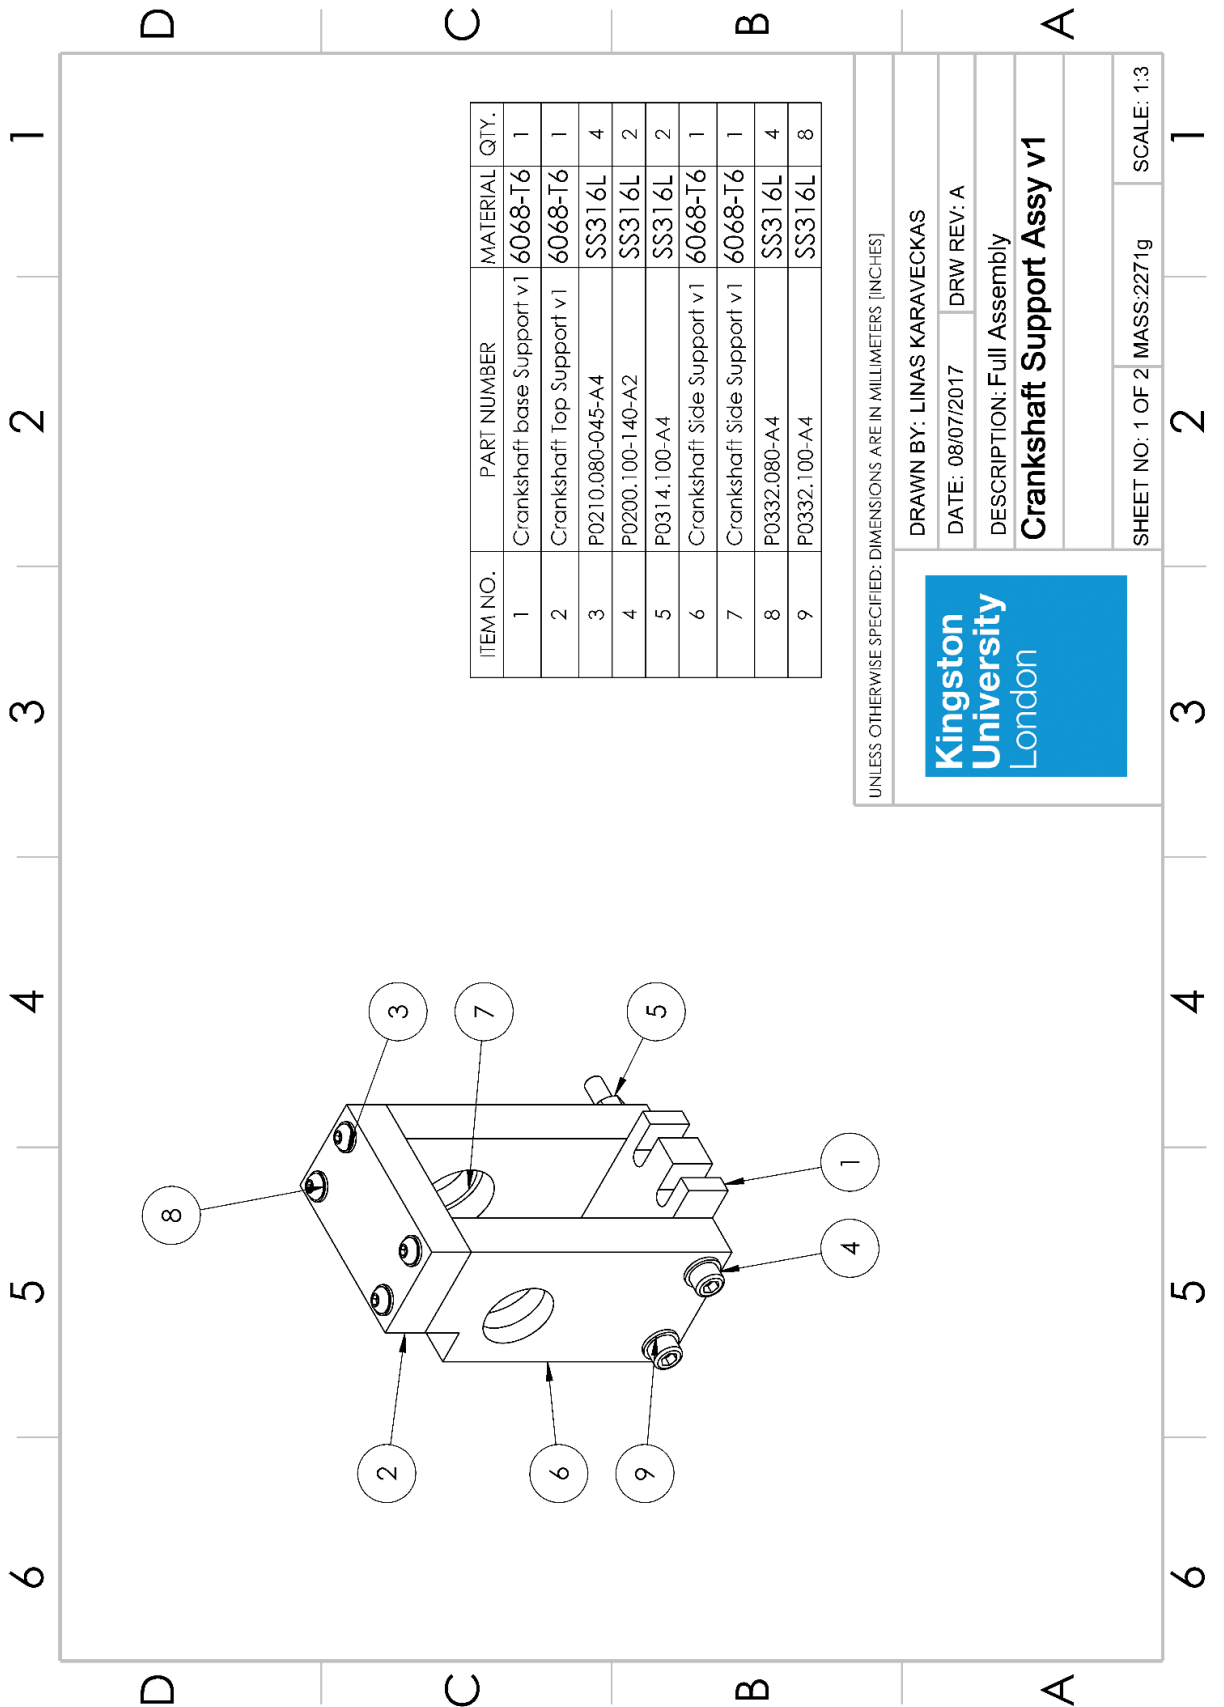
Mark II Crankshaft Support Drawing, Pg.1
